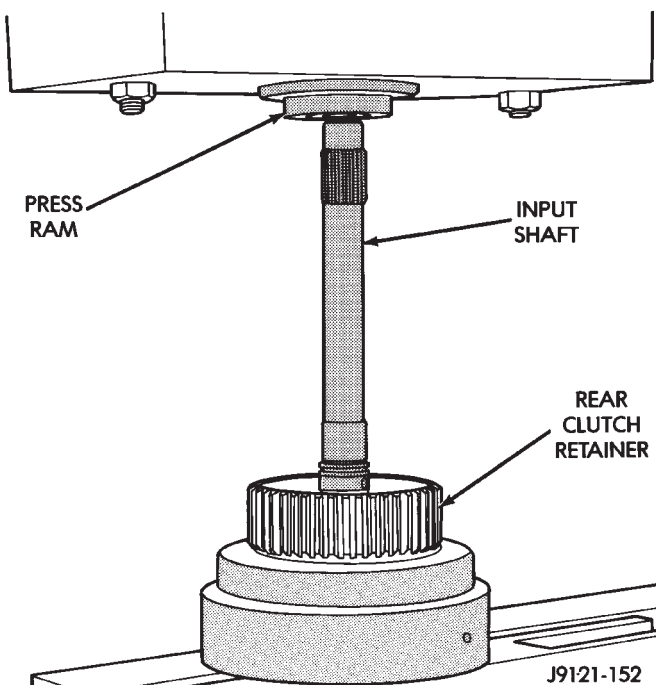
Pressing Input Shaft Into Rear Clutch Retainer
